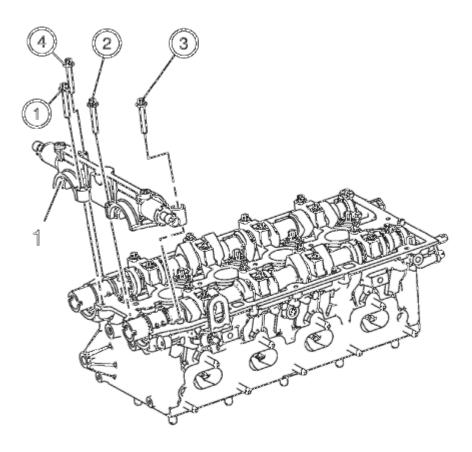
Camshaft Bearing Cap Courtesy of GENERAL MOTORS COMPANY
